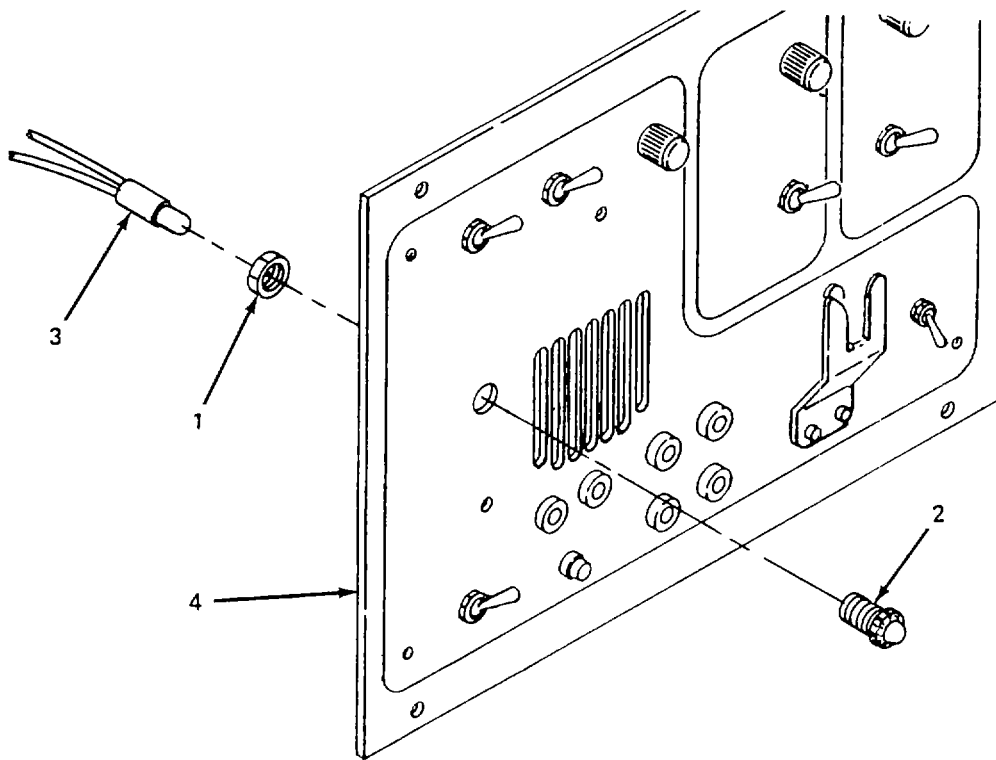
Front Panel Chassis Assembly Indicator Light, Replace.
